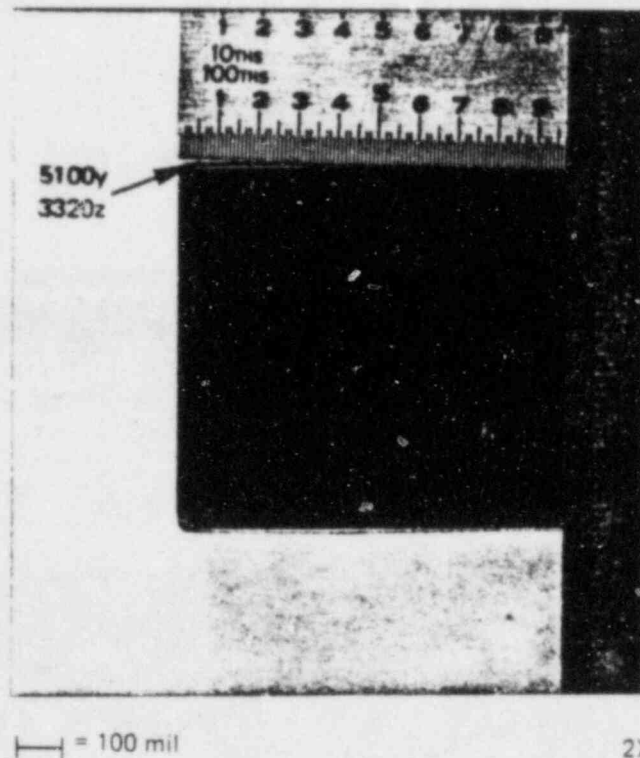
BUTT-WELDED CARBON STEEL PLATE -
